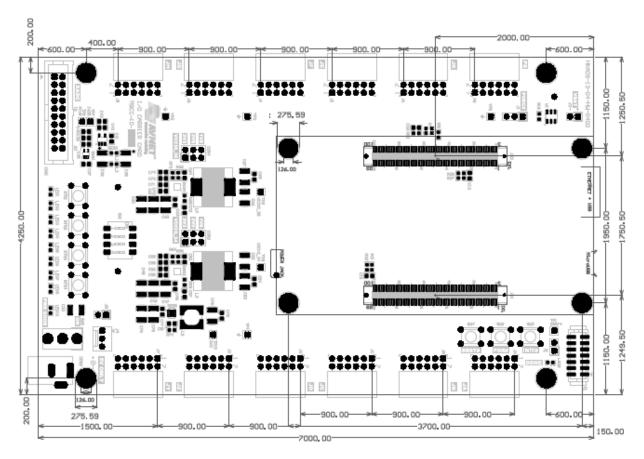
Mechanical Layout of I/O Carrier Card MicroHeader Connectors and Mounting Holes
